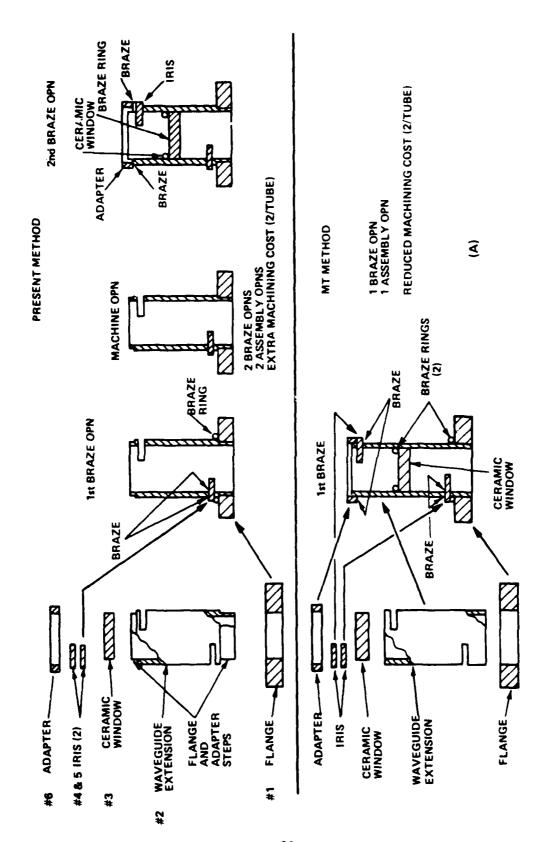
INPUT/OUTPUT WAVEGUIDE ASSEMBLY
